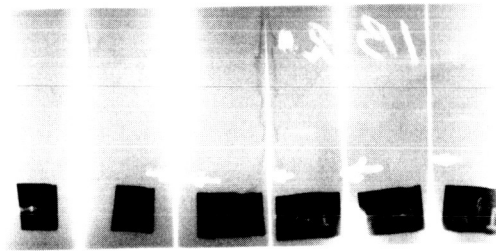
X-ray Positive Print Showing Defects Reproduced
